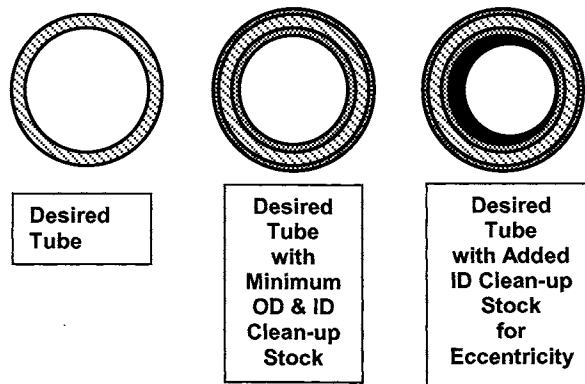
Tolerances requirement for mechanical tubing
